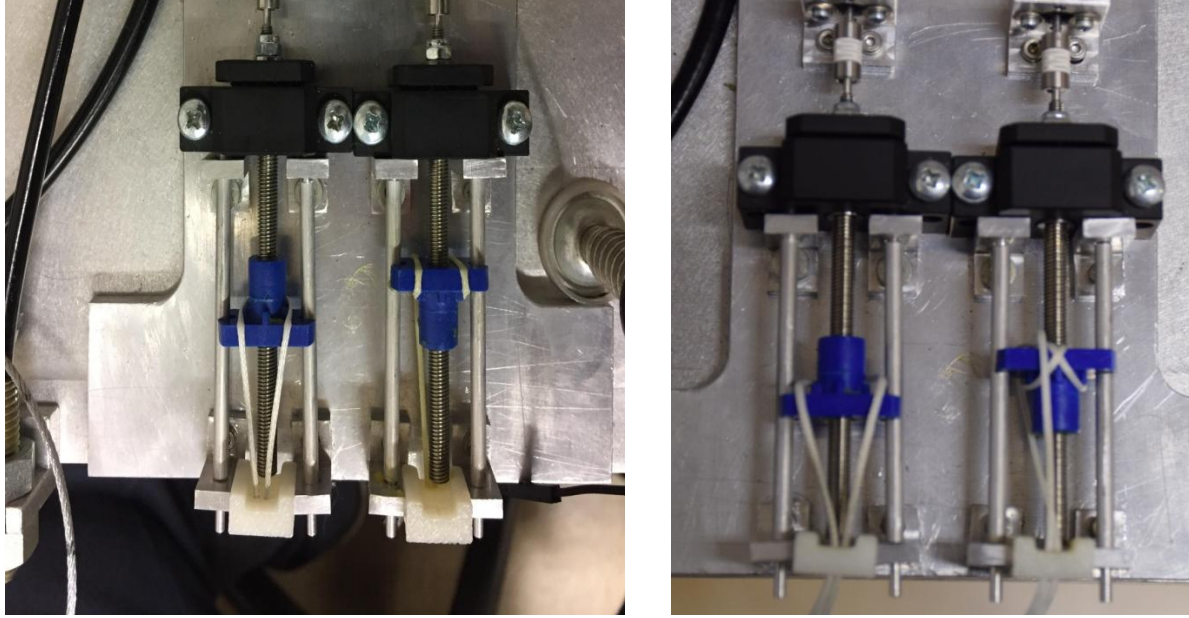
Power screws before (left) and after the improvement of the assembly.
